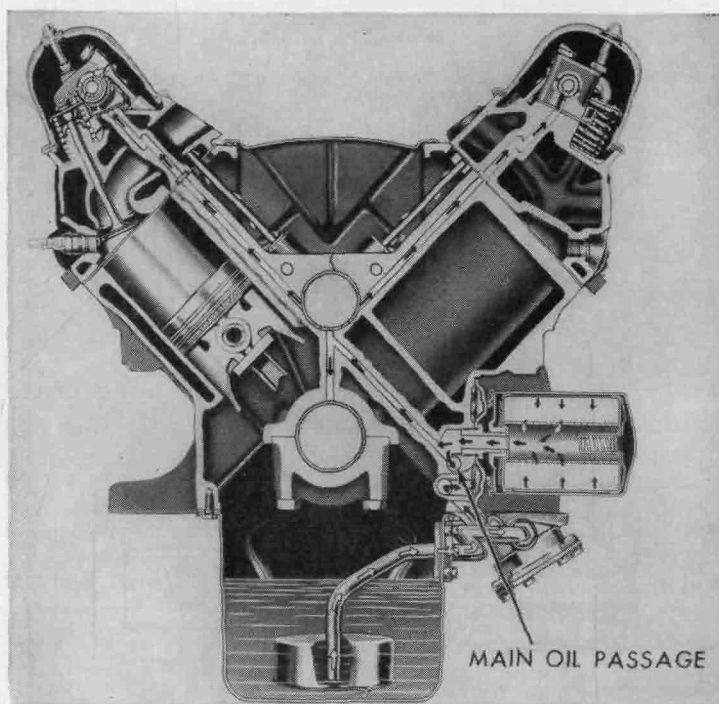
Lubrication system of a V-8 overhead-valve engine. Arrows show oil flow to moving parts in engine. (Mercury Division of Ford Motor Company)
